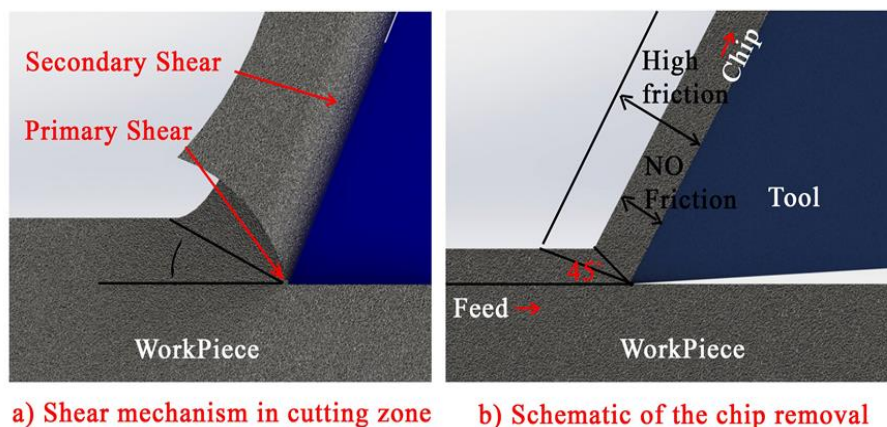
The shear mechanism and chip removal in cutting region [15]
